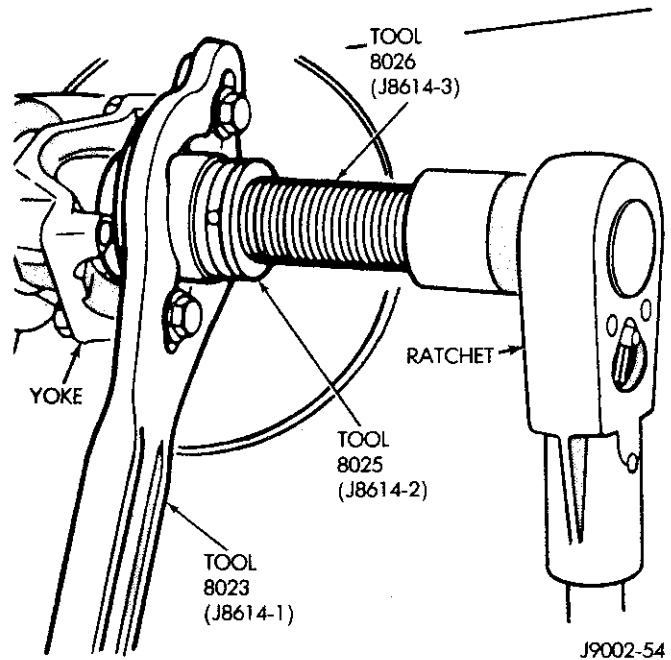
Drive Pinion Gear Shaft (Axle) Yoke Removal
